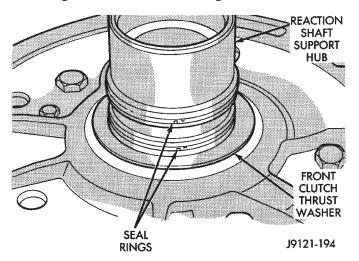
Reaction Shaft Support Seal Rings And Front Clutch Thrust Washer
